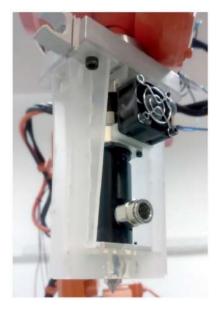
The industrial extruder with the supportive system mounded on the robotic arm
